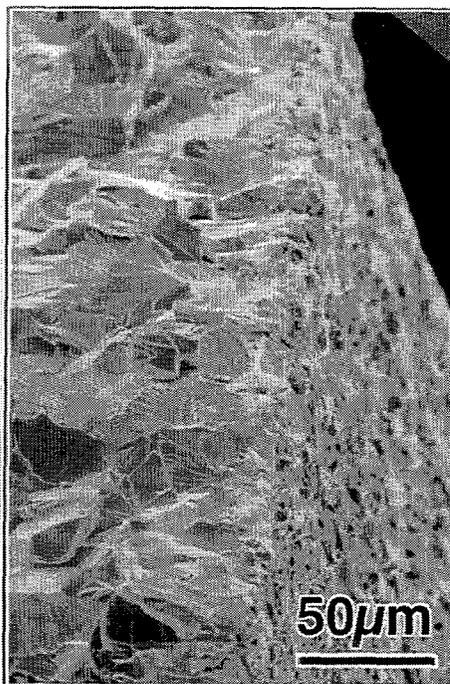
View of inner surface of pinhole and fracture surface of QN74 specimen. Crack grew from outer specimen surface towards pinhole.
